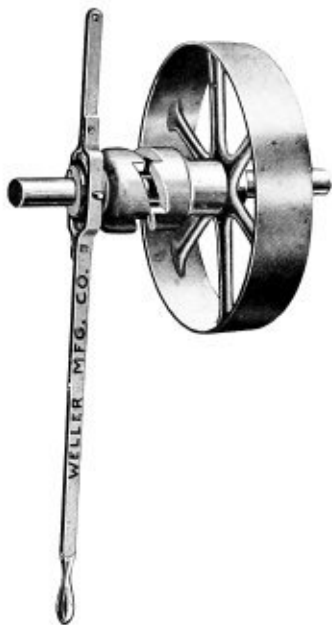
Spiral Jaw Clutch attached to Pulley.
